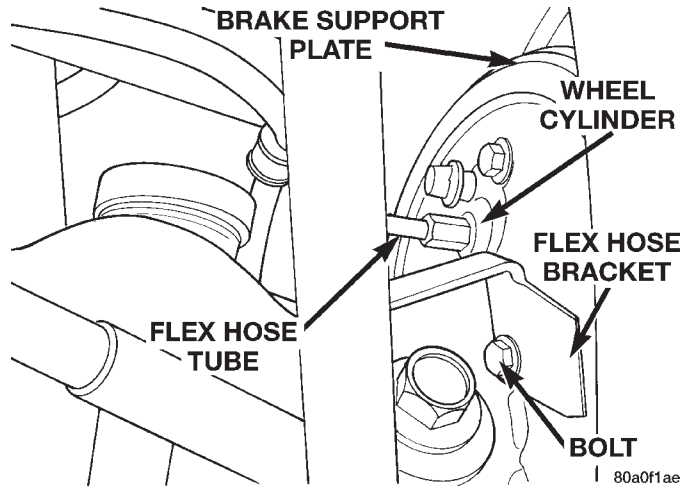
Brake Flex Hose Tube At Wheel Cylinder
